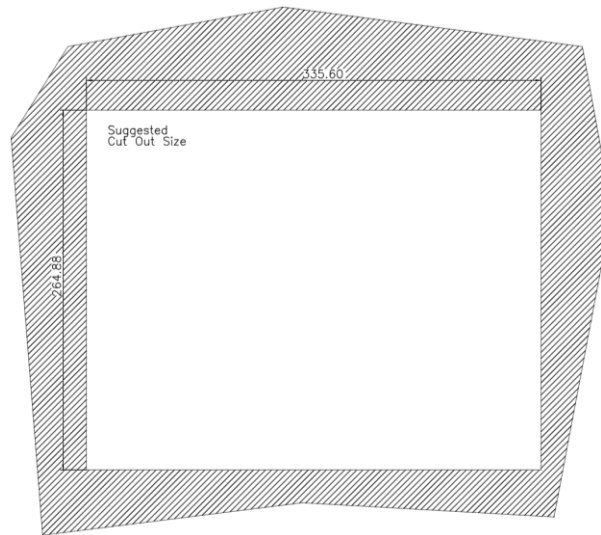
DM2-150E(L) Cutout Dimensions (Unit: mm)
